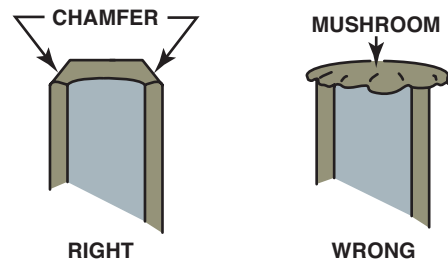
Use a grinder or a file to remove the mushroom material on the end of a punch or chisel.
